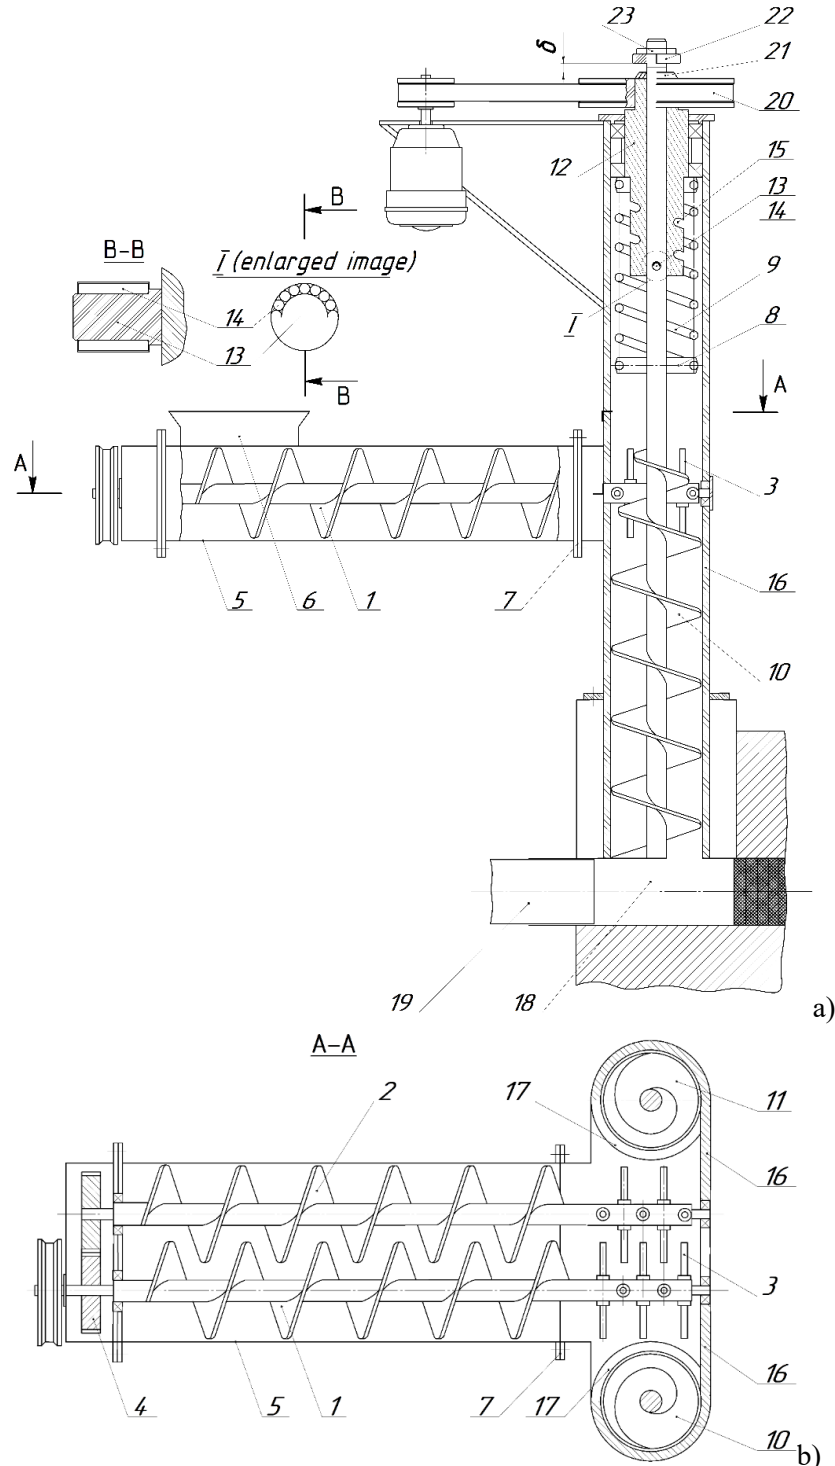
Design scheme of the modernized screw feeding mechanism for an impact briquetting press: general view (a); 1 and 2 – horizontal screws; 3 – blade; 5 – housing; 6 – hopper; 7 – flange; 8 – support; 9 – spring; 10 and 11 – vertical screws; 12 – drive shaft; 13 – pin; 14 – needle bearing; 15 – groove; 16 – housing tube; 18 – pressing chamber; 19 – ram; 20 – pulley; 21 – disc spring; 22 – nut; 23 – locknut; section A-A (b); 4 – gear; 17 – loading window
